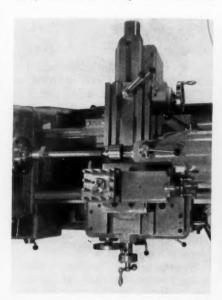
Plan view of engine lathe equipped with semi-automatic screw-cutting attachment.
